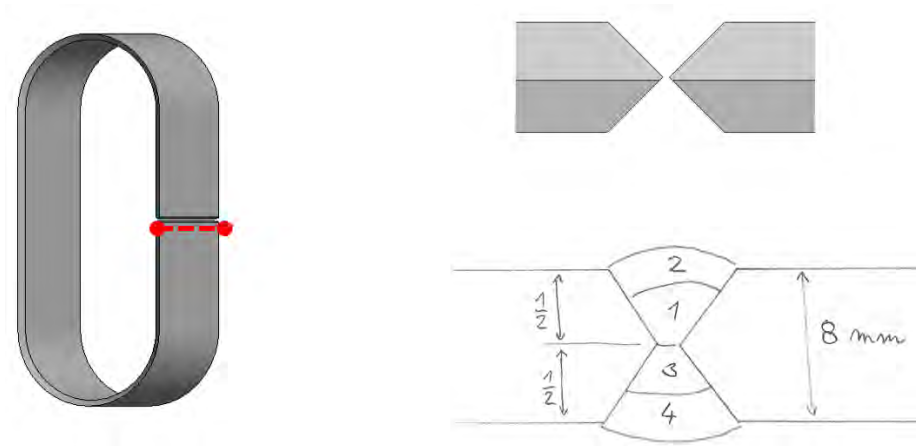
Connecting weld of the MN port shell, the corresponding bevel shape and layout of weld passes
